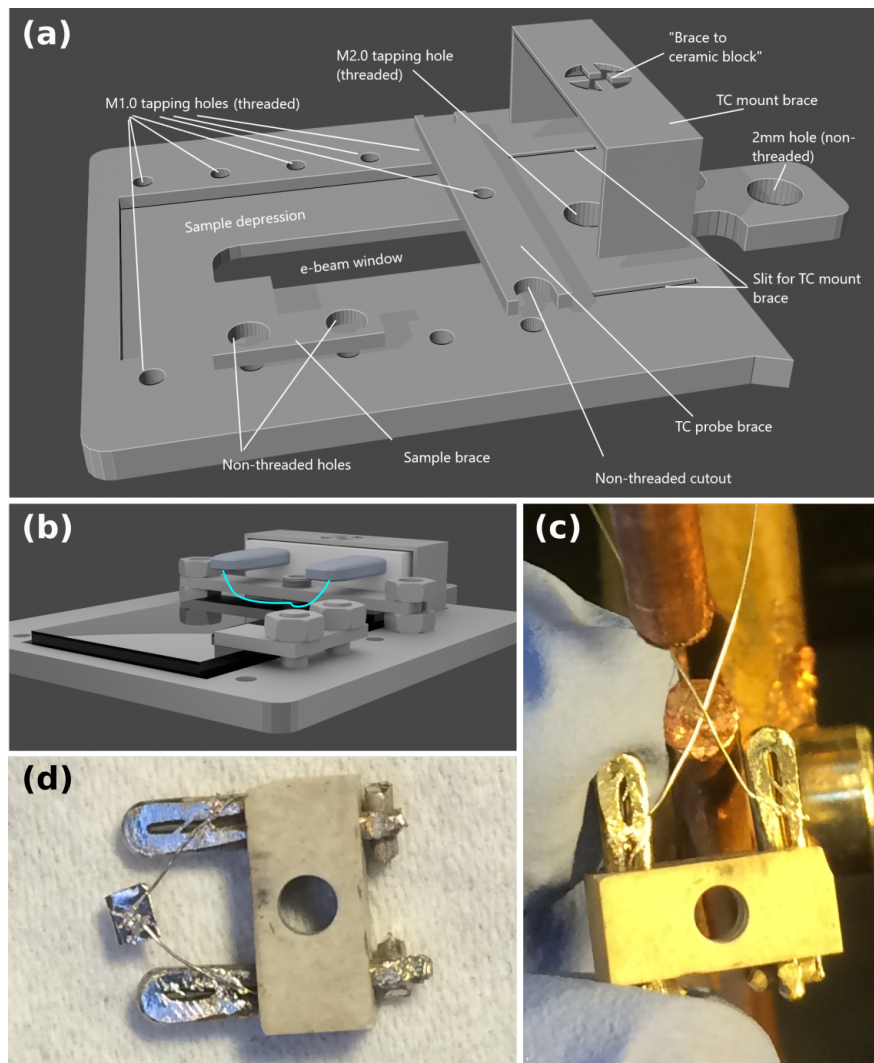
New TPD sampleholder design (a) with key features identified and (b) mounted with a glassy carbon sheet (rendered example image) The [blue wire](#) indicates the thermocouple probe attached under a fixing screw which is held by the *TC probe brace*. (c) image of my spot welding technique for the 0.125 mm thermocouple, and (d) the finished result including the "pressure cup" of Ta foil.
